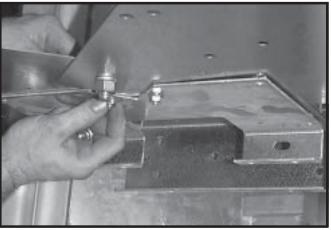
Bolting J-plate bottom hanger bearing mounts to hopper bulkheads.
